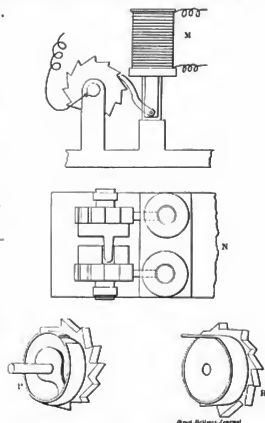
DETAILS OF SETTING AND CLEARING DEVICE
